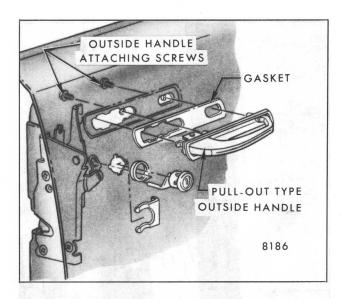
Outside Handle Removal (Pull-Out Type)
